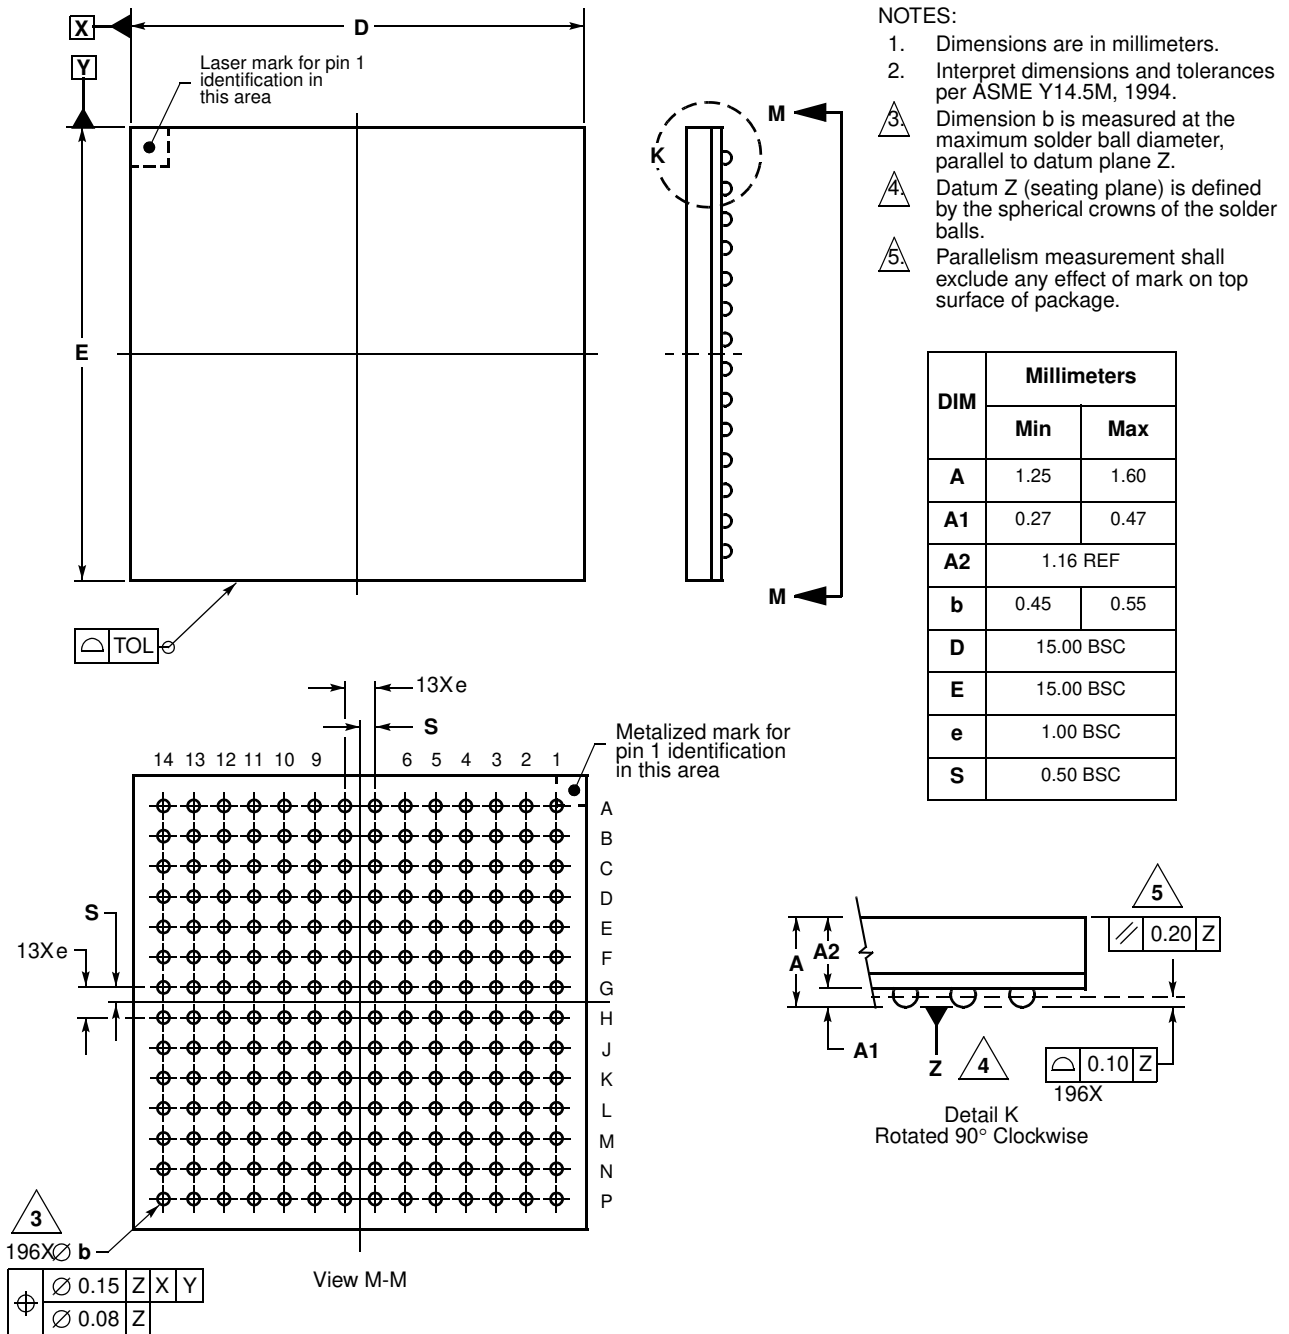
196 MAPBGA Package Dimensions (Case No. 1128A-01)
